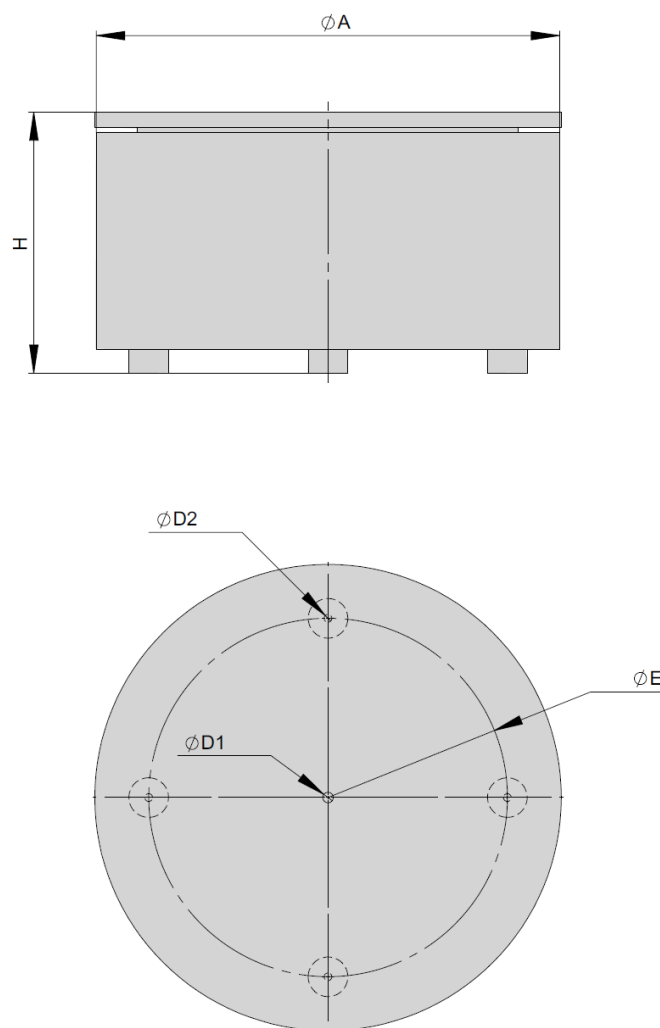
Dimensional drawing WV151-1 / WV310-1
